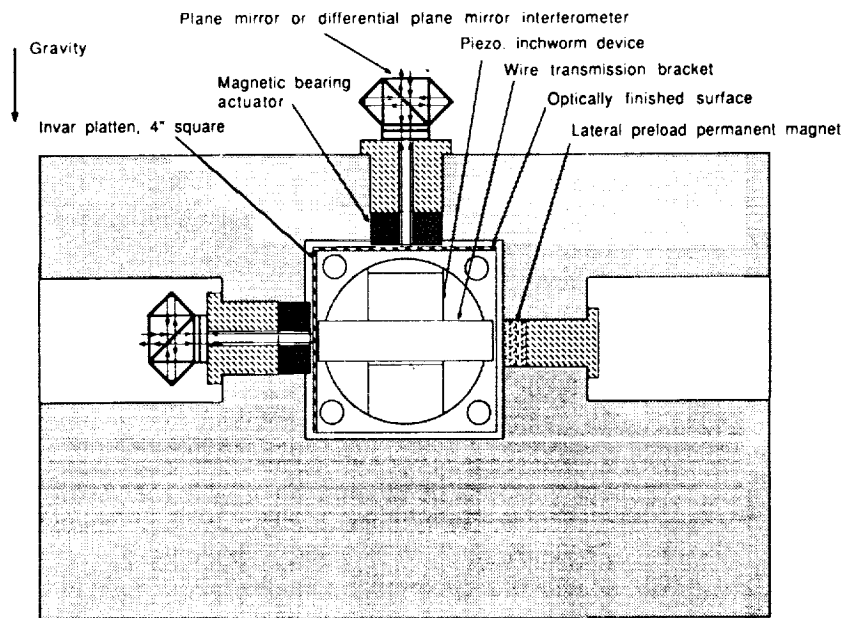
Cutaway right end view of Atomic Resolution Measuring Machine (ARMM)
